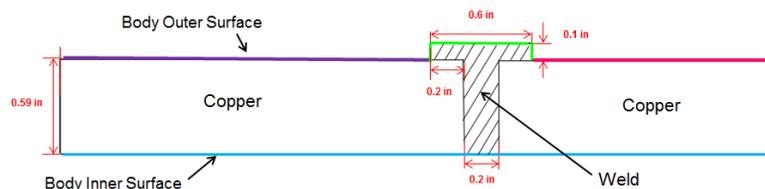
Detailed dimensions of Weld on Tuyere Surface
